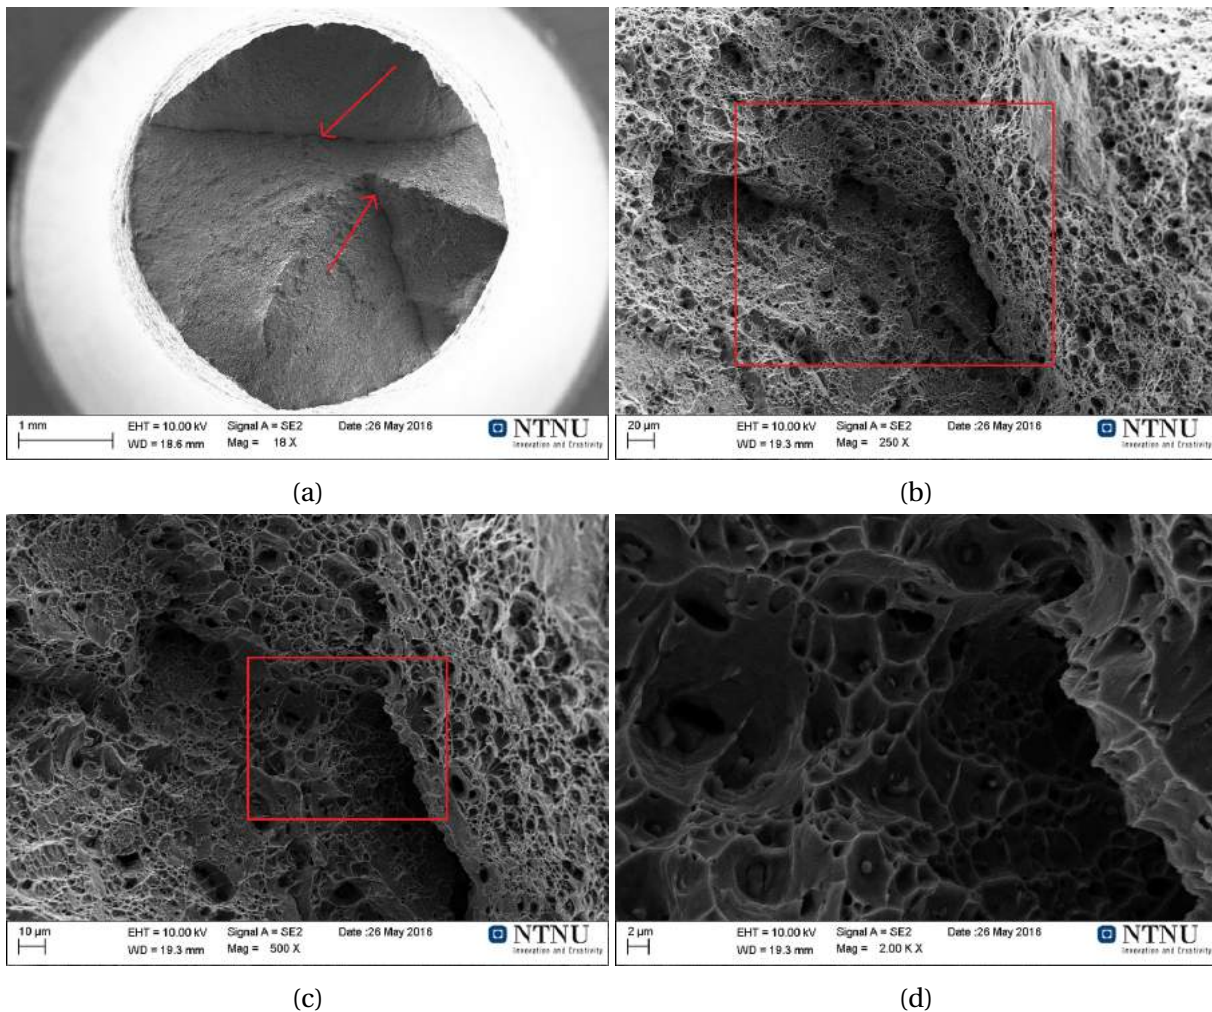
Fracture surface of conventional ram extruded Al-10%Mg.
